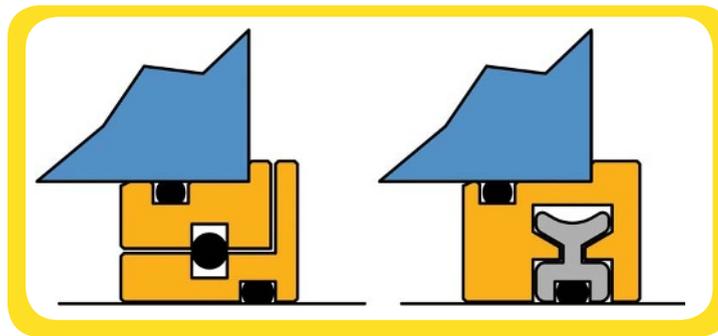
Rotating labyrinth seals with (left) dynamic O-ring opposite sharp-edged groove and (right) a sealing lip engaging a tapered groove
